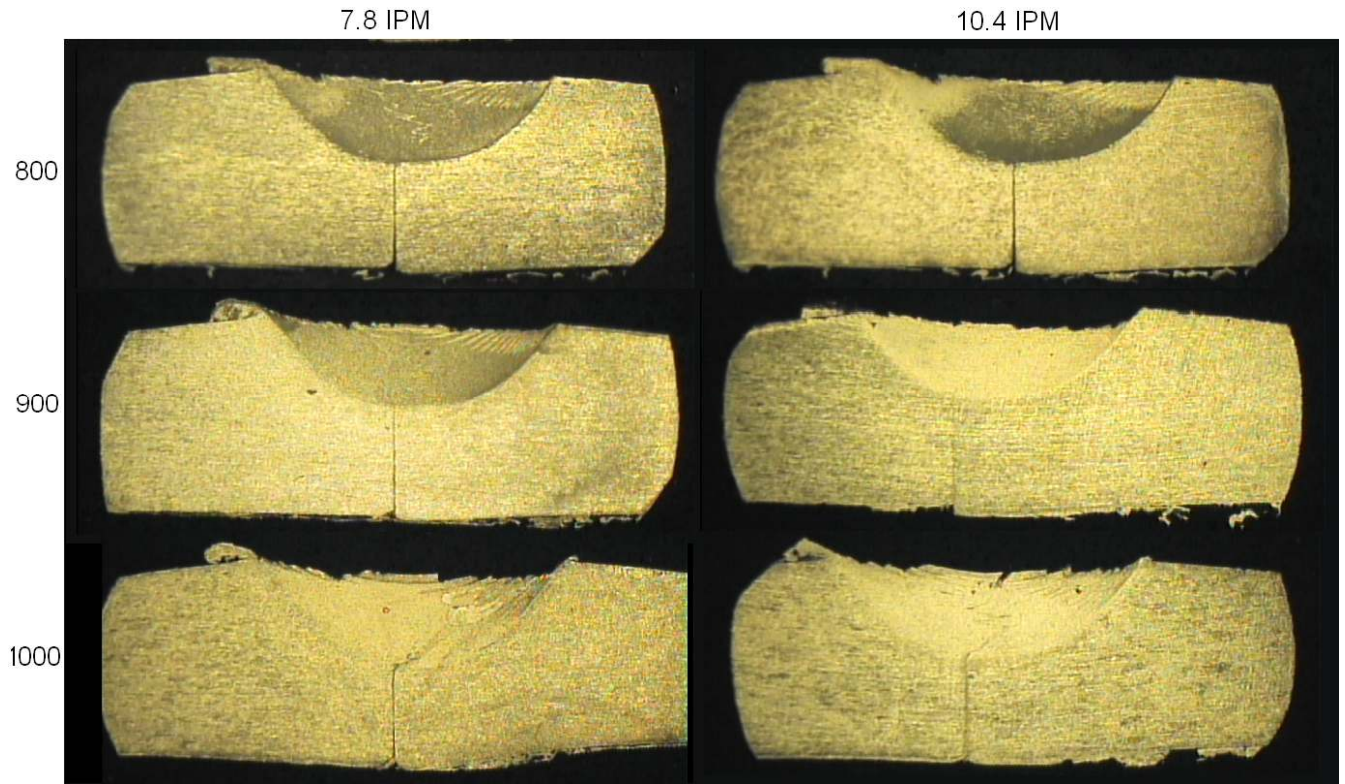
Lateral macrosections for partial-penetration, unsupported welds made with the conical tool. Samples are taken from the steady-state portion of each weld.
